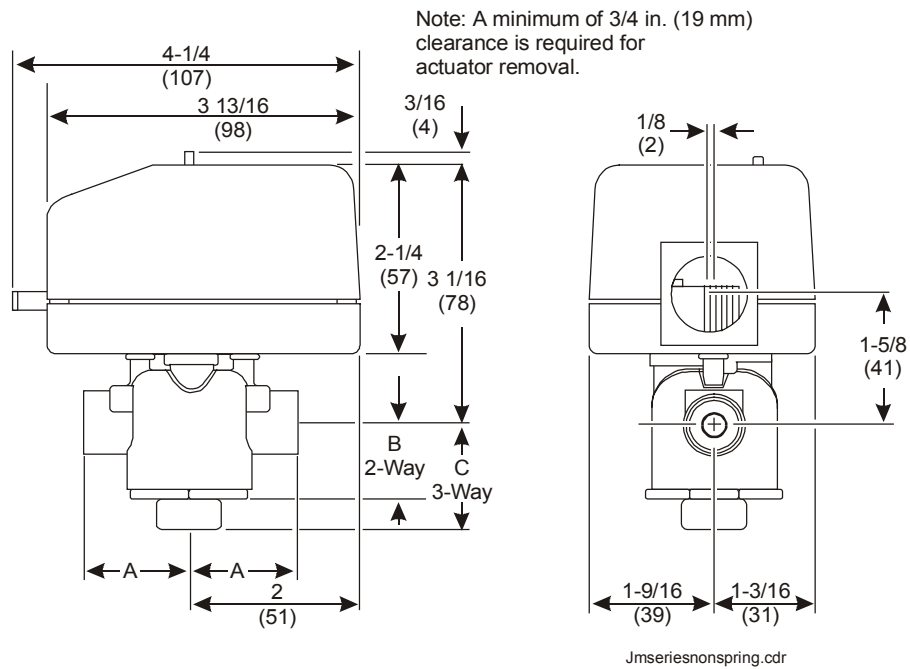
JM Series Non-Spring Return Modulating Electric Zone Valve Dimensions, in. (mm)
